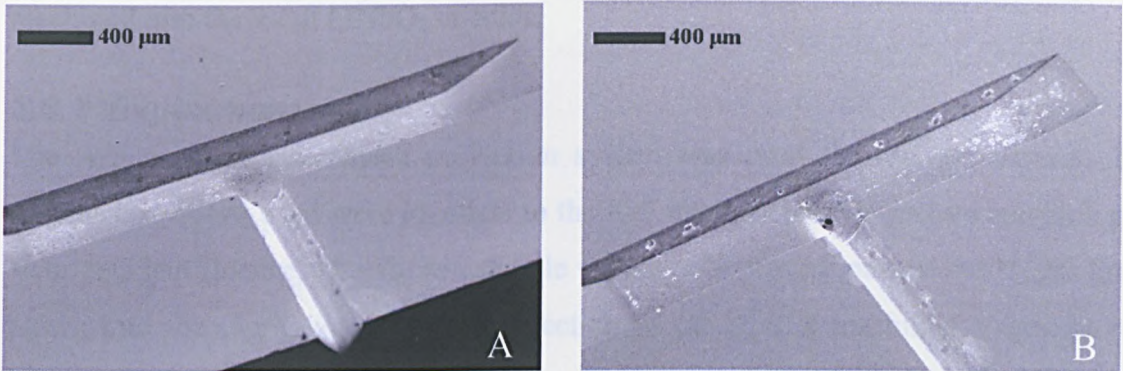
Optical fibre alignment platforms machined in x-cut (A) and z-cut (B) LiNbO_3 .
